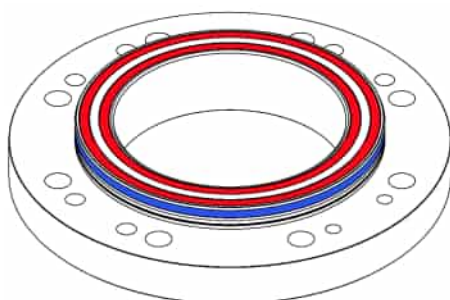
FEP-O-seal (red) and outer flange seal (blue)
